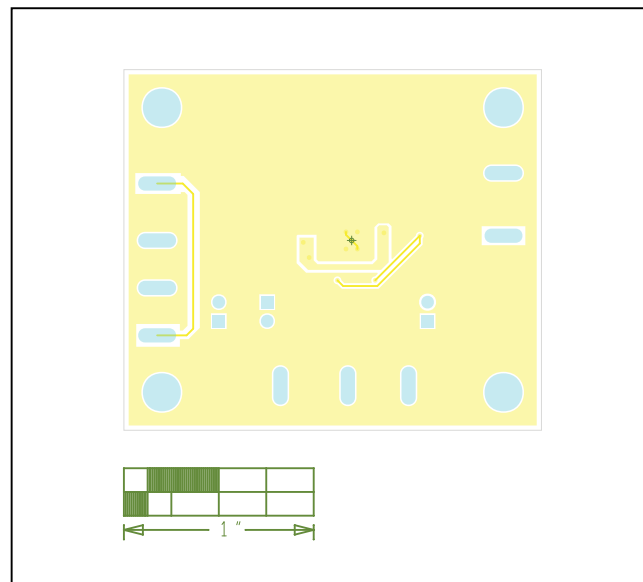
MAX17551 5V EV Kit (μMAX) PCB Layout—Solder Side
